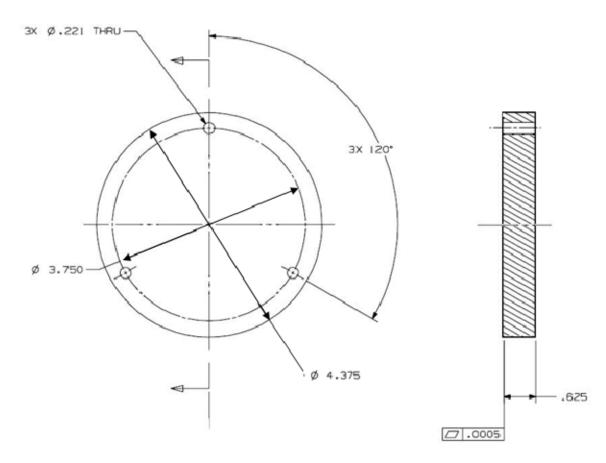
Manufacturing Drawing of the Target Plate [After 5]
